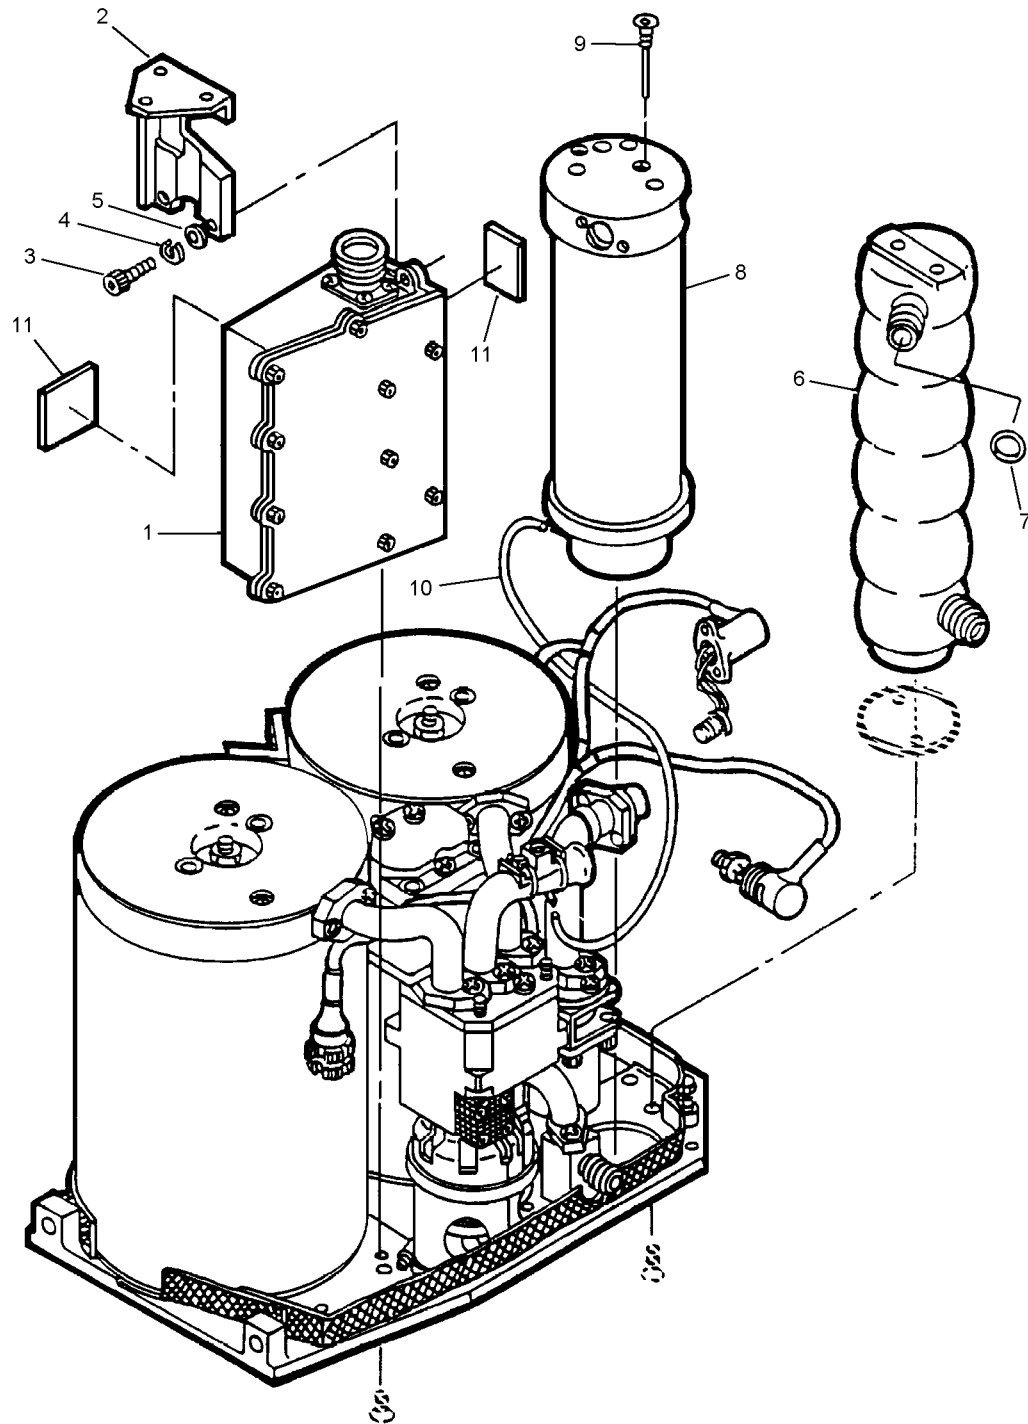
Junction Box Assembly/Heater Assembly/Inlet Filter Assembly
